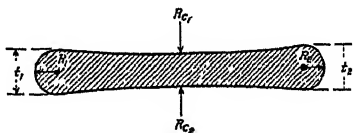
CROSS-SECTION OF DOUBLE-CONCAVE FLAT BAR STOCK
